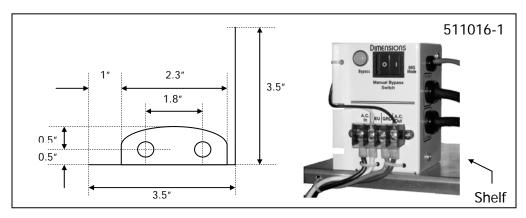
CMBPS-30ATR open case shelf mounting and footprints
